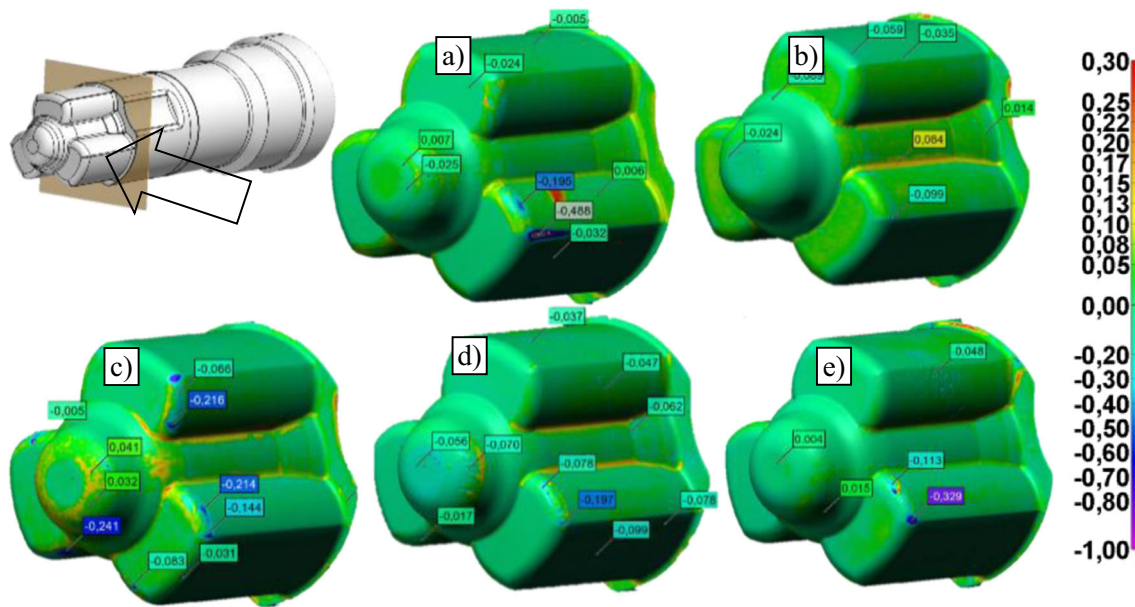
Comparison of the geometry of punches with the CAD model of the tool. a Made of Unimax steel after producing 4372 forgings, b made of Unimax steel after producing 6249 forgings, c nitrided with a low potential after producing 6249 forgings, d with a hybrid layer PN + AlCrTiN after producing 1850 forgings, e with a hybrid layer PN + CrN after producing 2000 forgings
